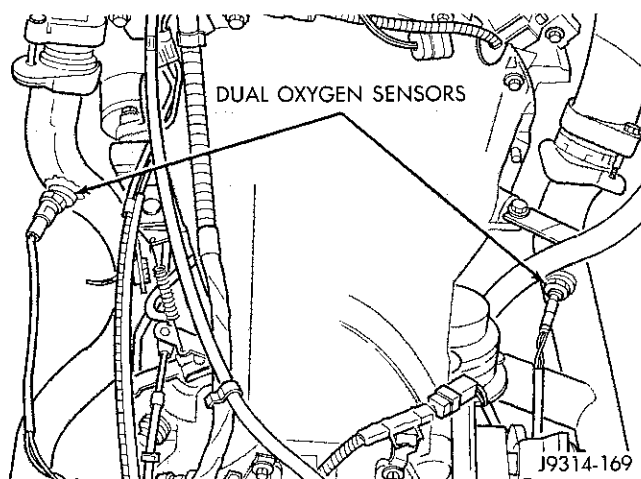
Left/Right Oxygen Sensor Locations—HDC/MDC Engines
